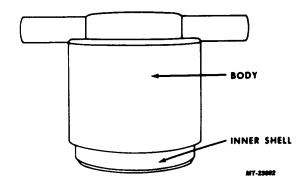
Air Cleaner Assembly (Replaceable Element Type)
